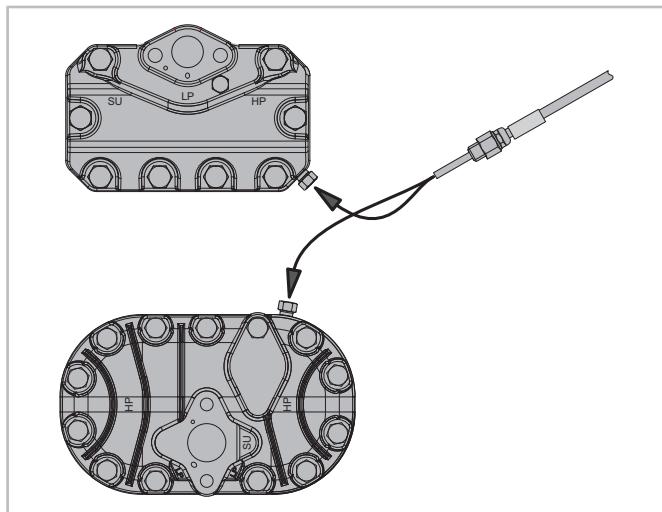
With start unloading, mount the temperature sensor directly on the SU cylinder head.
